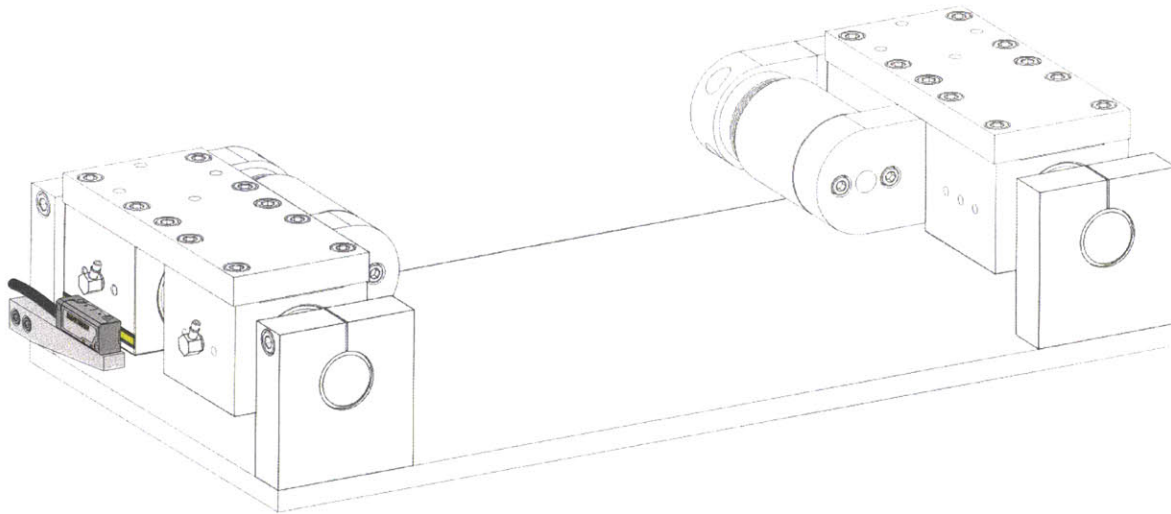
Print head construction: Each side of the print head was instrumented with linear optical encoders, able to measure movement with 10nm resolution. The read-head is fixed to the guide rod mounts, while the scale is glued onto the front air bushing pillow block.
